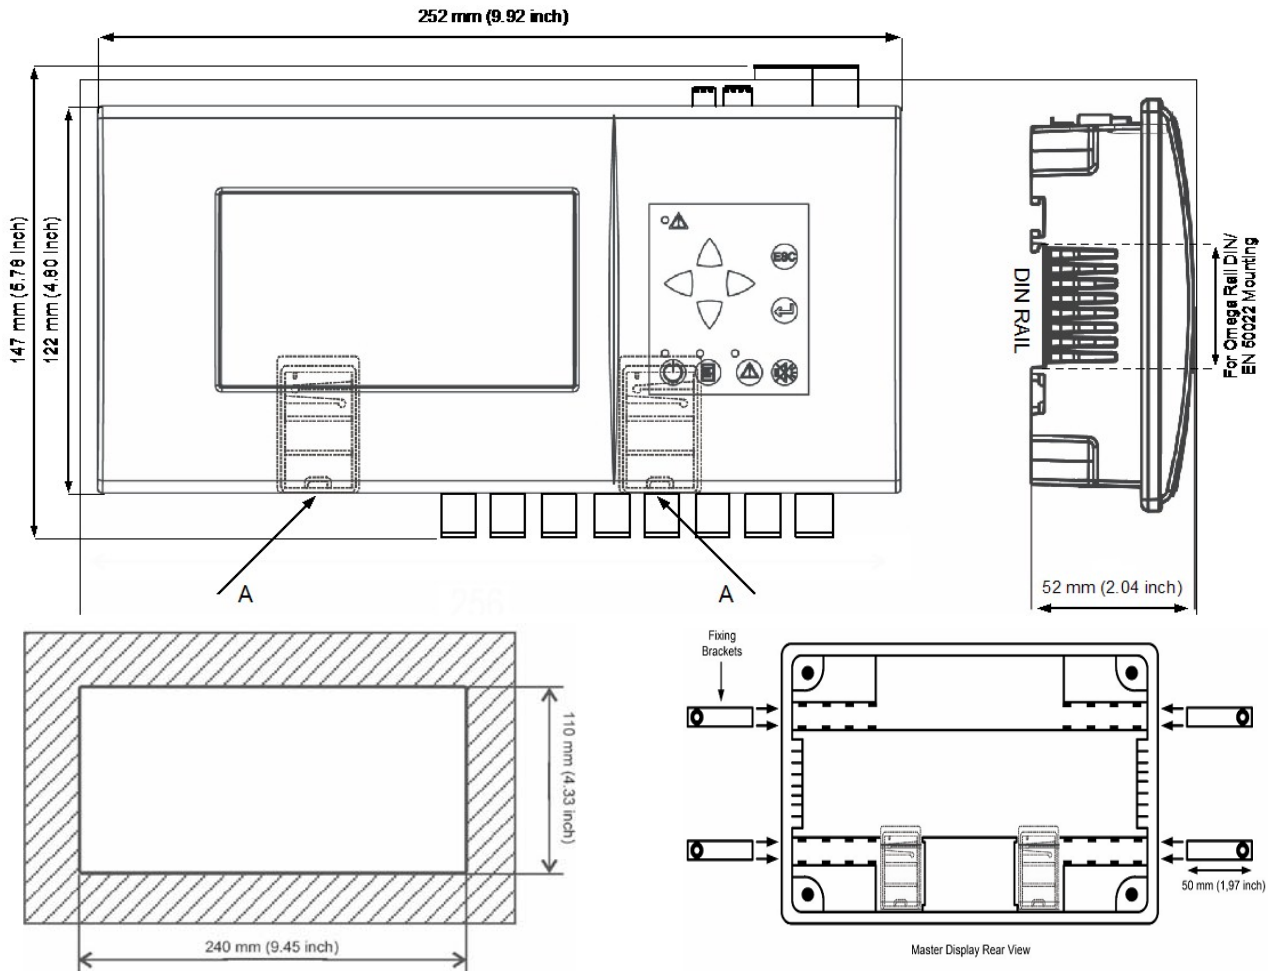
Master Display Dimensions and Panel Mounting Installation Cut-Out
